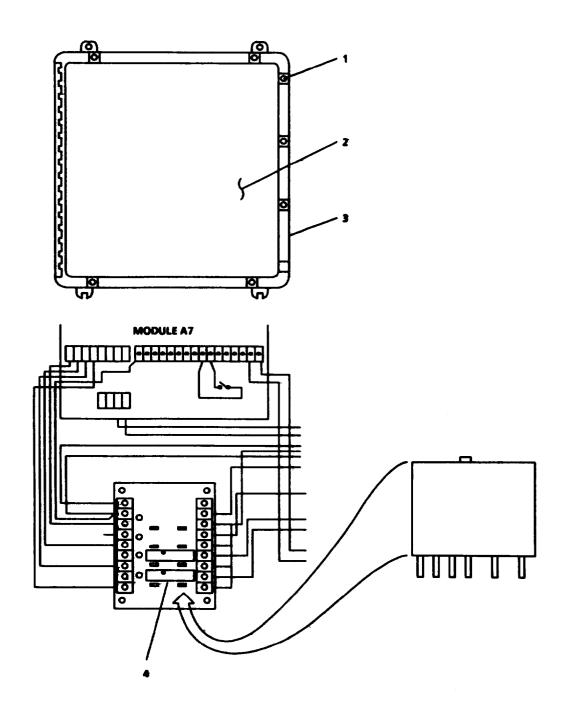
Port Engine Remote Module (Sheet 1 of 2).
